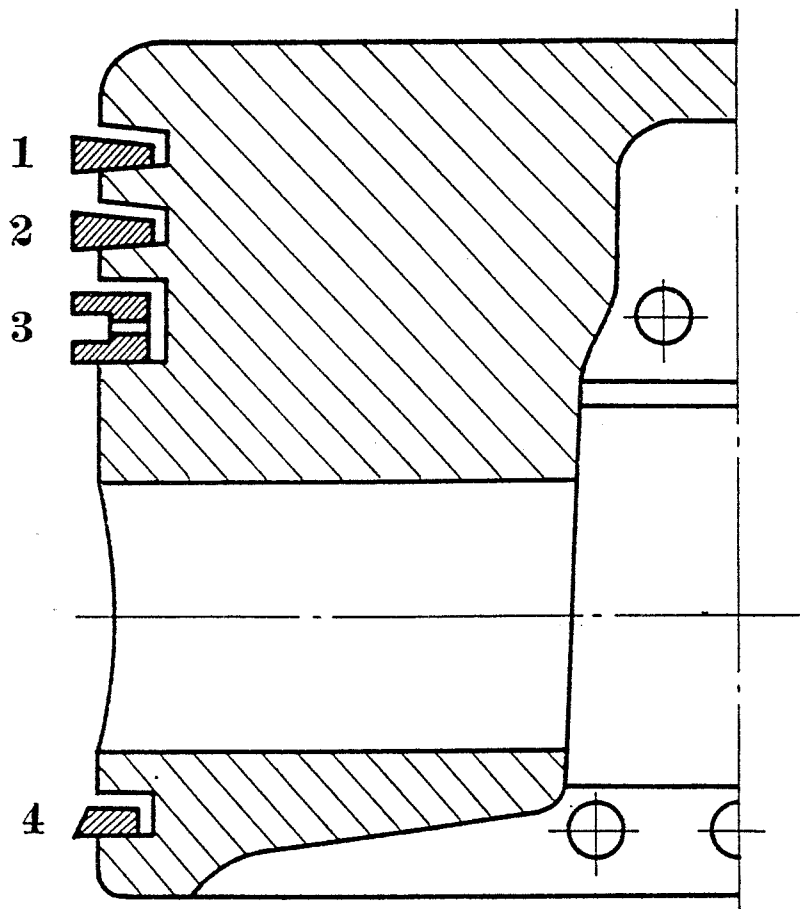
Mounting Scheme of the Piston Ring of Type-6 Piston Engine
